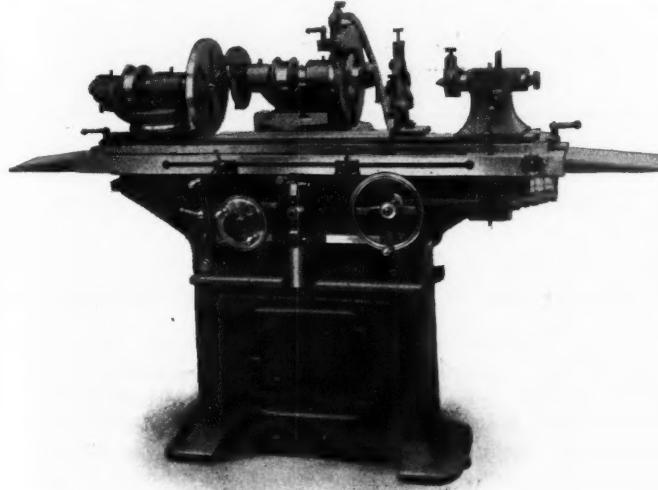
Twelve- by Thirty-inch Universal Grinder built by the Morse Twist Drill & Machine Co.
